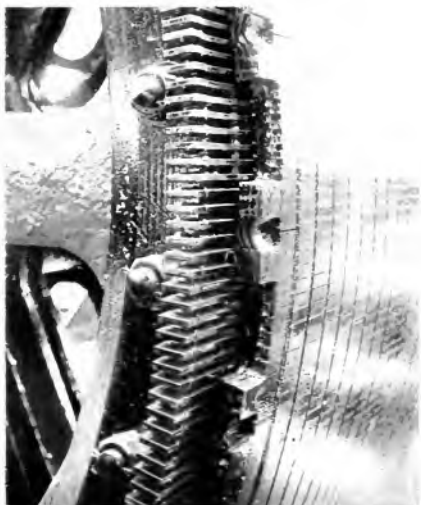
A Portion of the Rotor, such as shown in Fig. 5 after the double squirrel-cage winding has been inserted. Laminated copper expansion joints are shown in the outer cage end-ring
